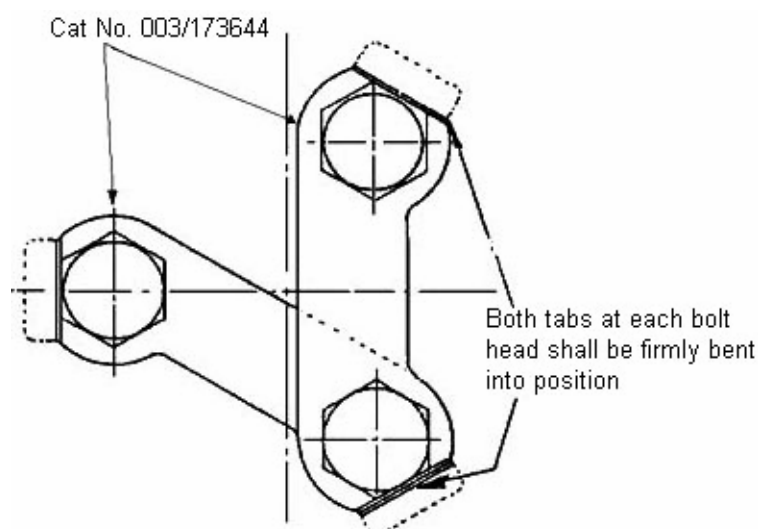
Method of Fitting Locking Plates to Axle Ends with Girling WSP
